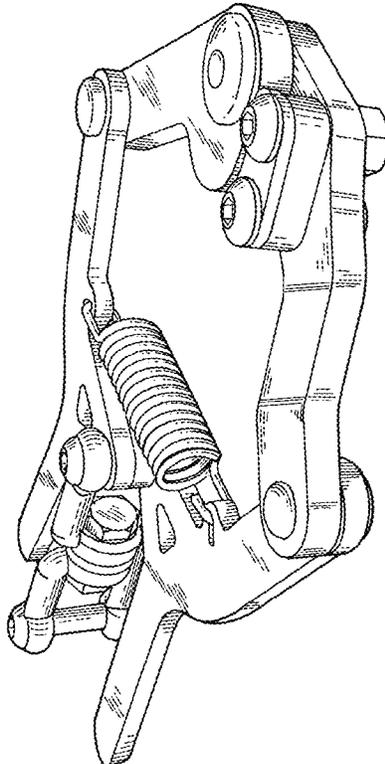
is a perspective front view of a wire strainer showing my new design with the wire holding jaws in an open position;
